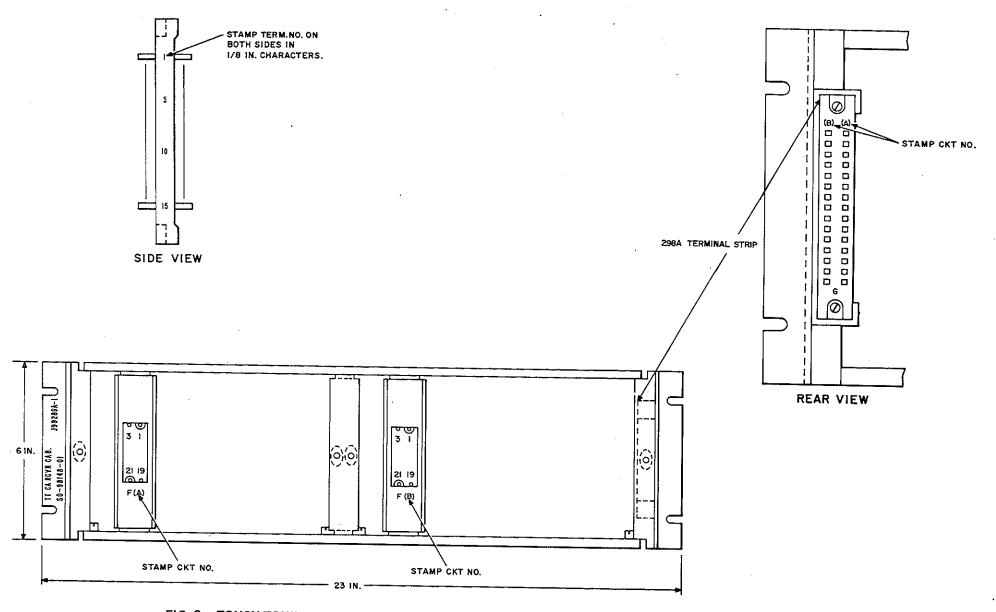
TOUCH-TONE Calling Receiver Unit Mounting Shelf (J99289A, List 1)—Front View
